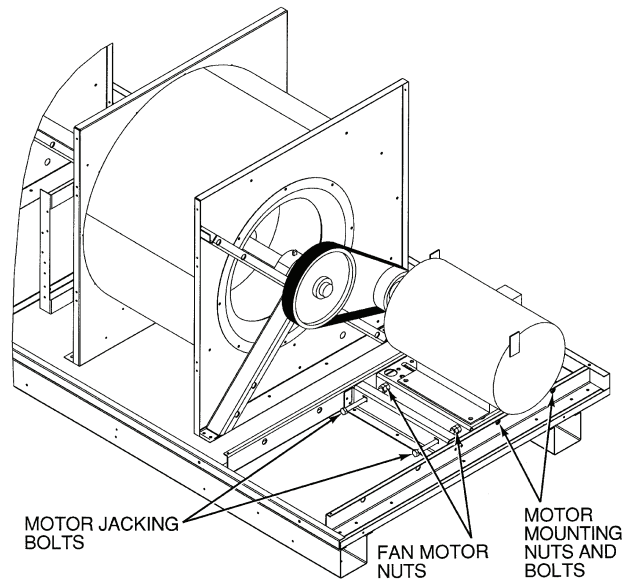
Evaporator-Fan Pulley Alignment and Adjustment
